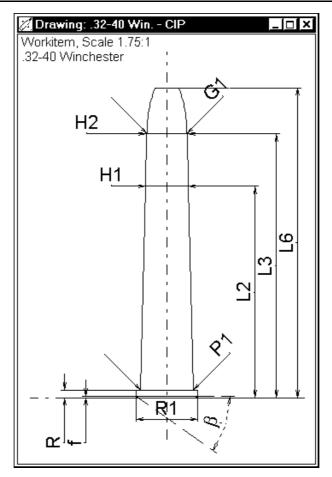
Cartridge Outline Drawing with Metrics and CIP Symbols
